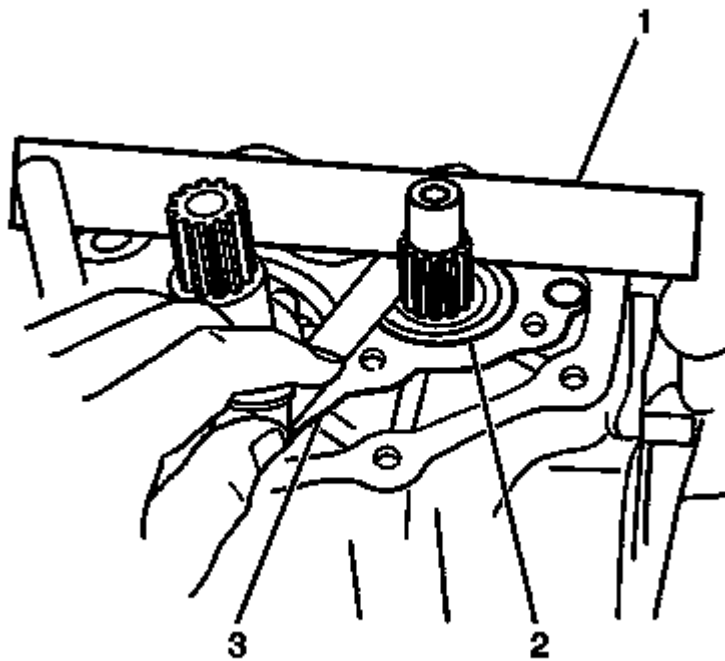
Measuring Clearance Between Transmission Case Surface And Bearing Outer Race Using A Straight Ruler And A Gauge
